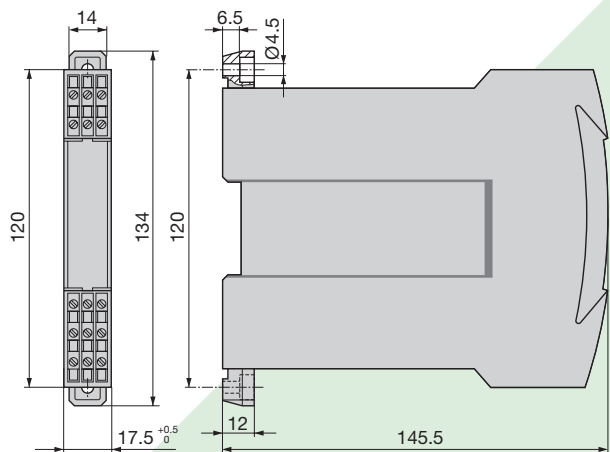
SINEAX TI 807-1.... (housing S17) screw hole mounting brackets pulled out.
